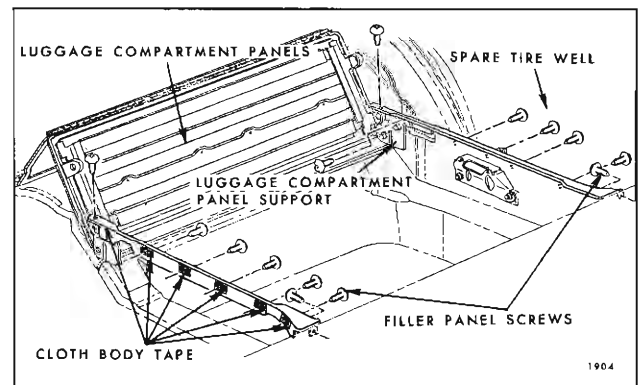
H30—Rear Compartment Pan Side Filler Panels
